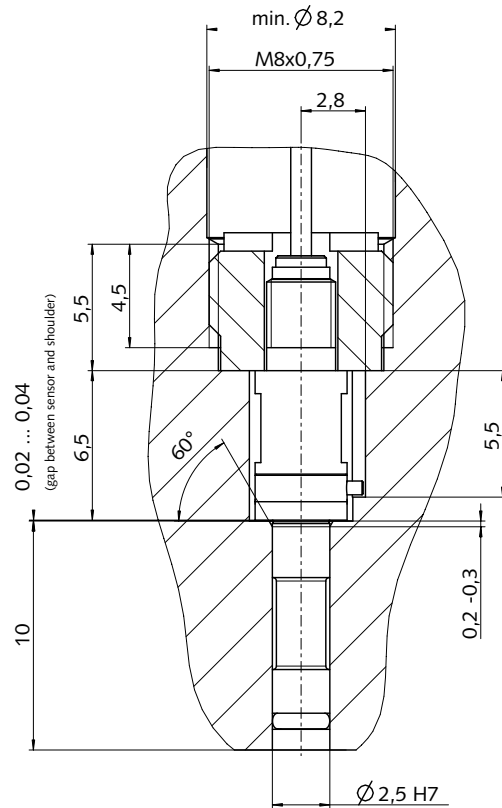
Optional installation with mounting nut Type 6460A1 and key way pin Type 65001430
